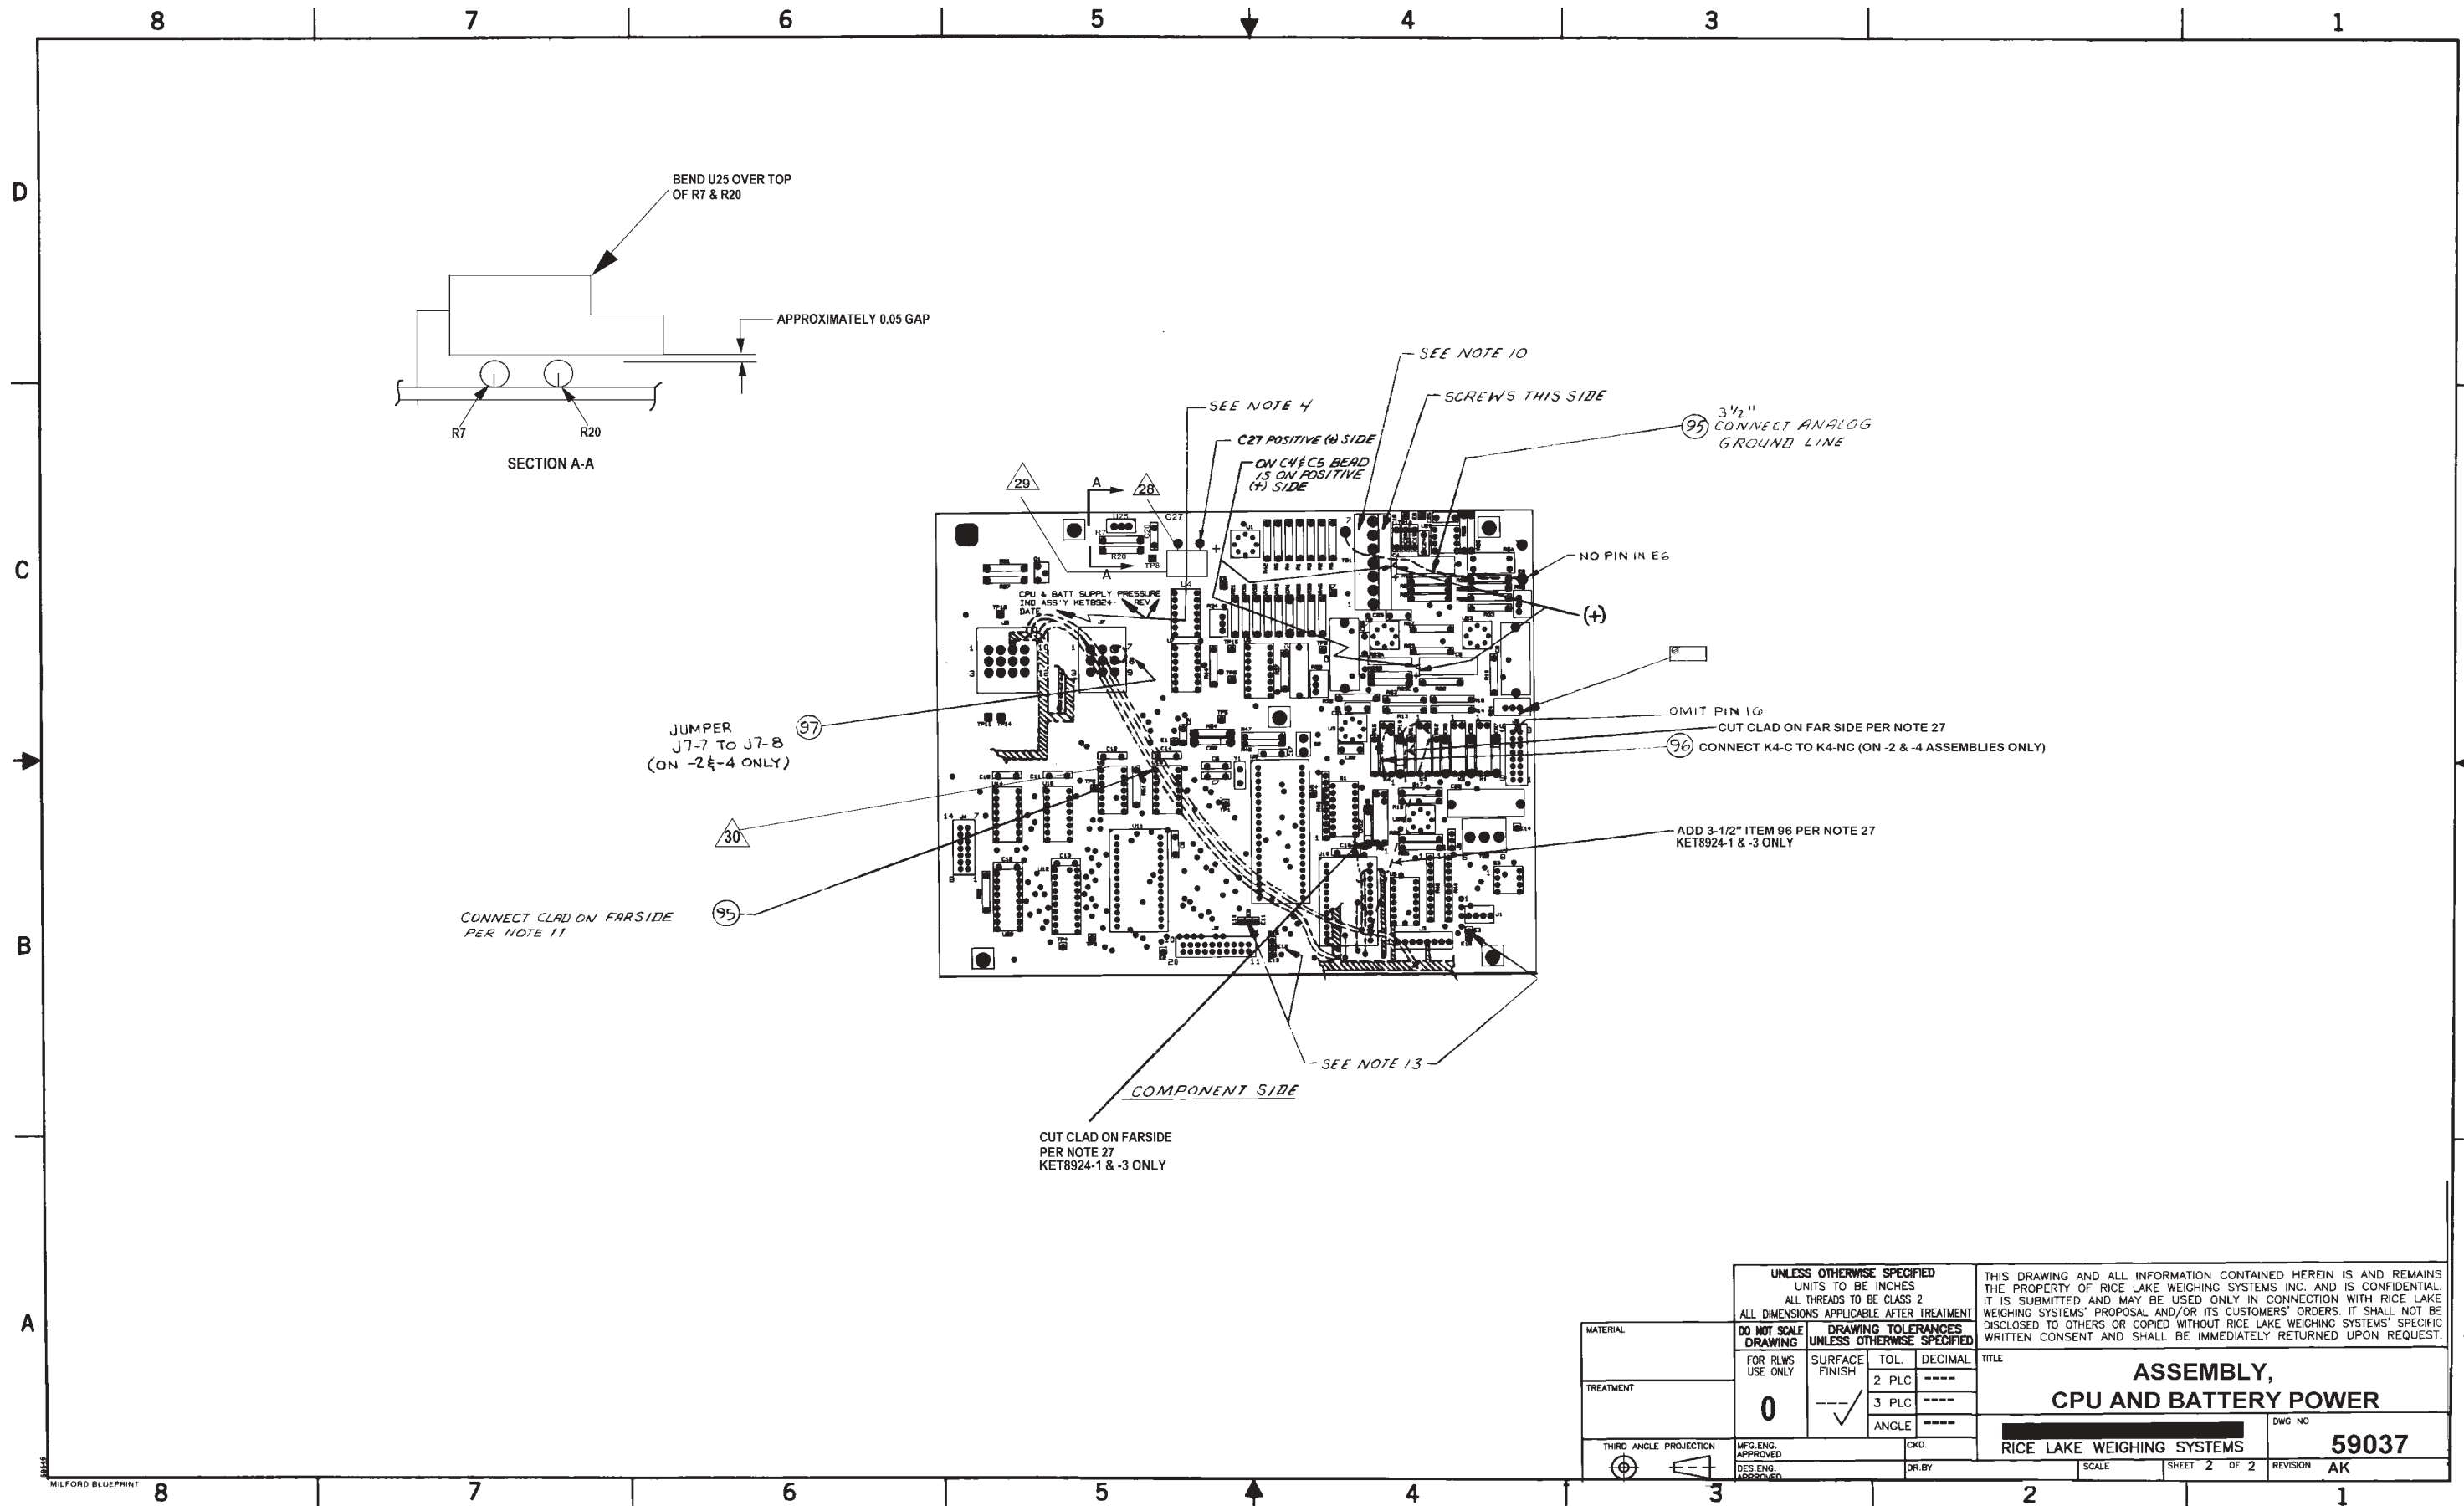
CPU Assembly, sheet 2 (For Battery Units Only)
